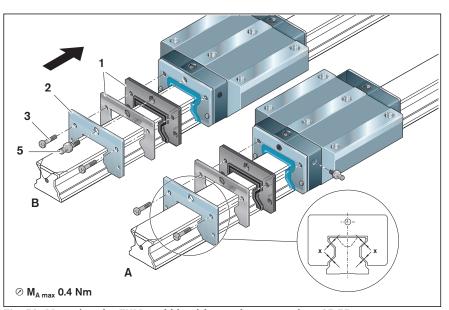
Mounting the FKM seal kit with metal scraper, sizes 25-55
